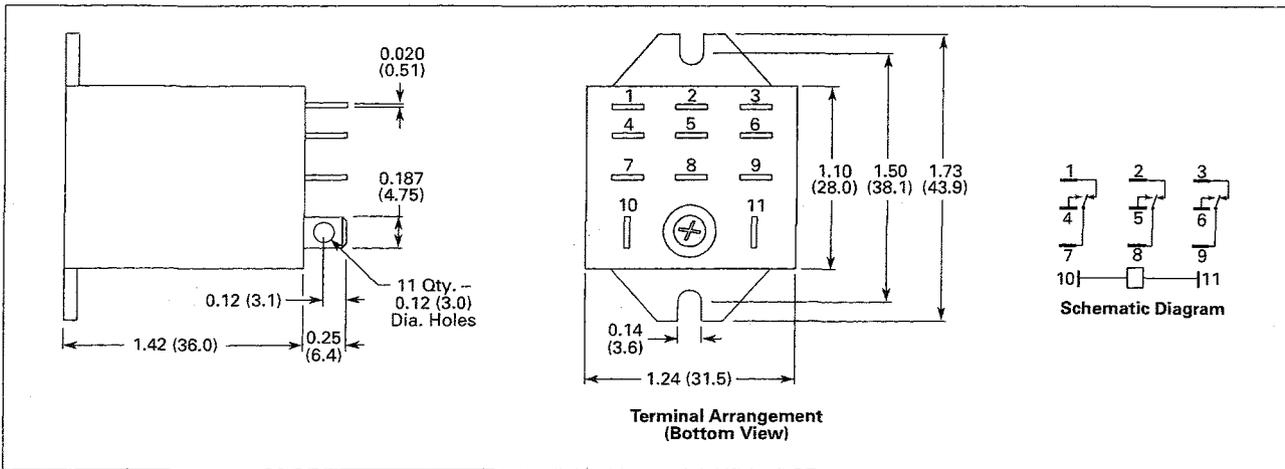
D7PR34 — Approximate Dimensions in Inches (mm)
